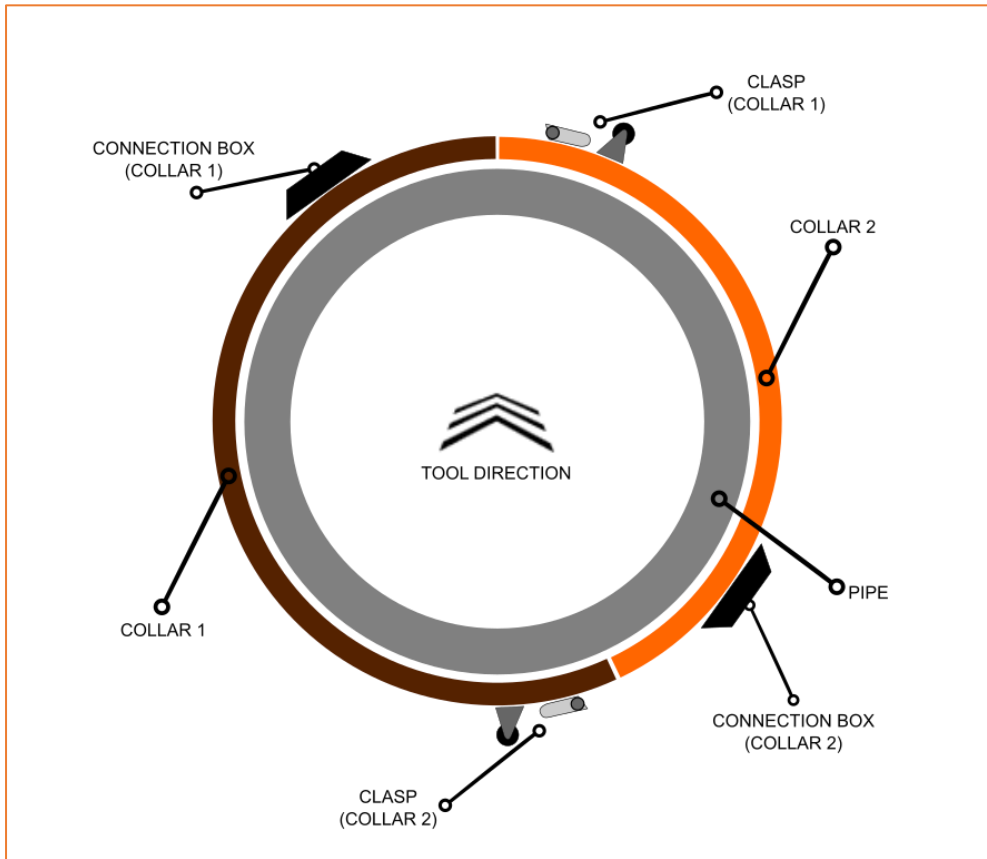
A cross-sectional view of the collar combination layout. The arrow in the centre of the pipe is the tool direction (into the page)
